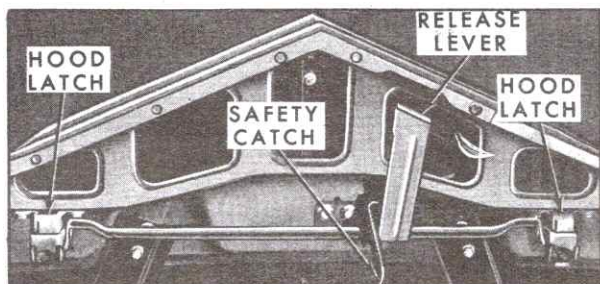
Hood Latch - 693 (See Note 11-1)
